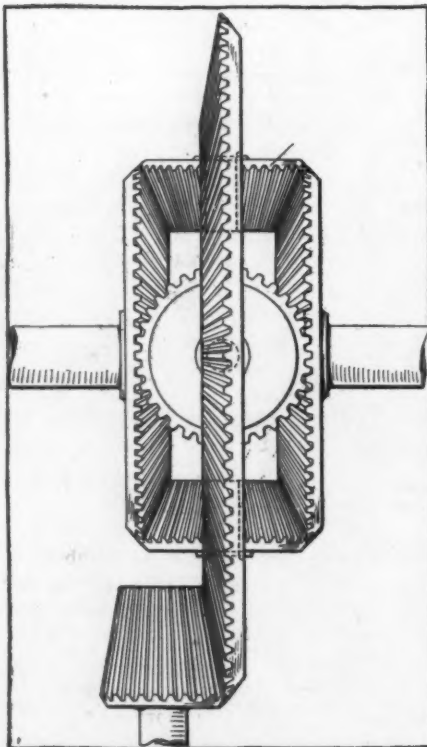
DIFFERENTIAL ASSEMBLED SHOWING RELATION OF PARTS
